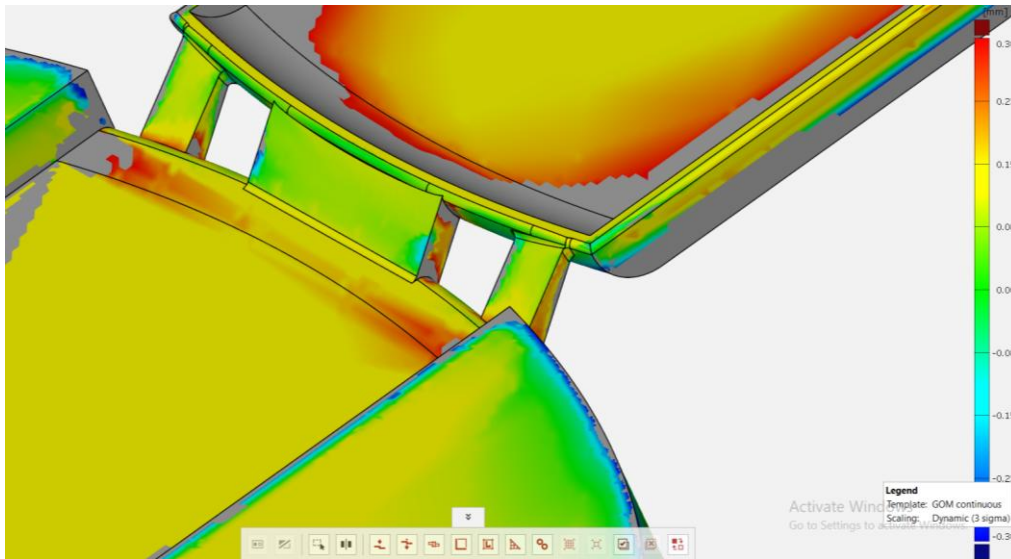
CAD inspection between hinge from the nominal CAD model and the hinge from the scanned 3D model of the manufactured product
